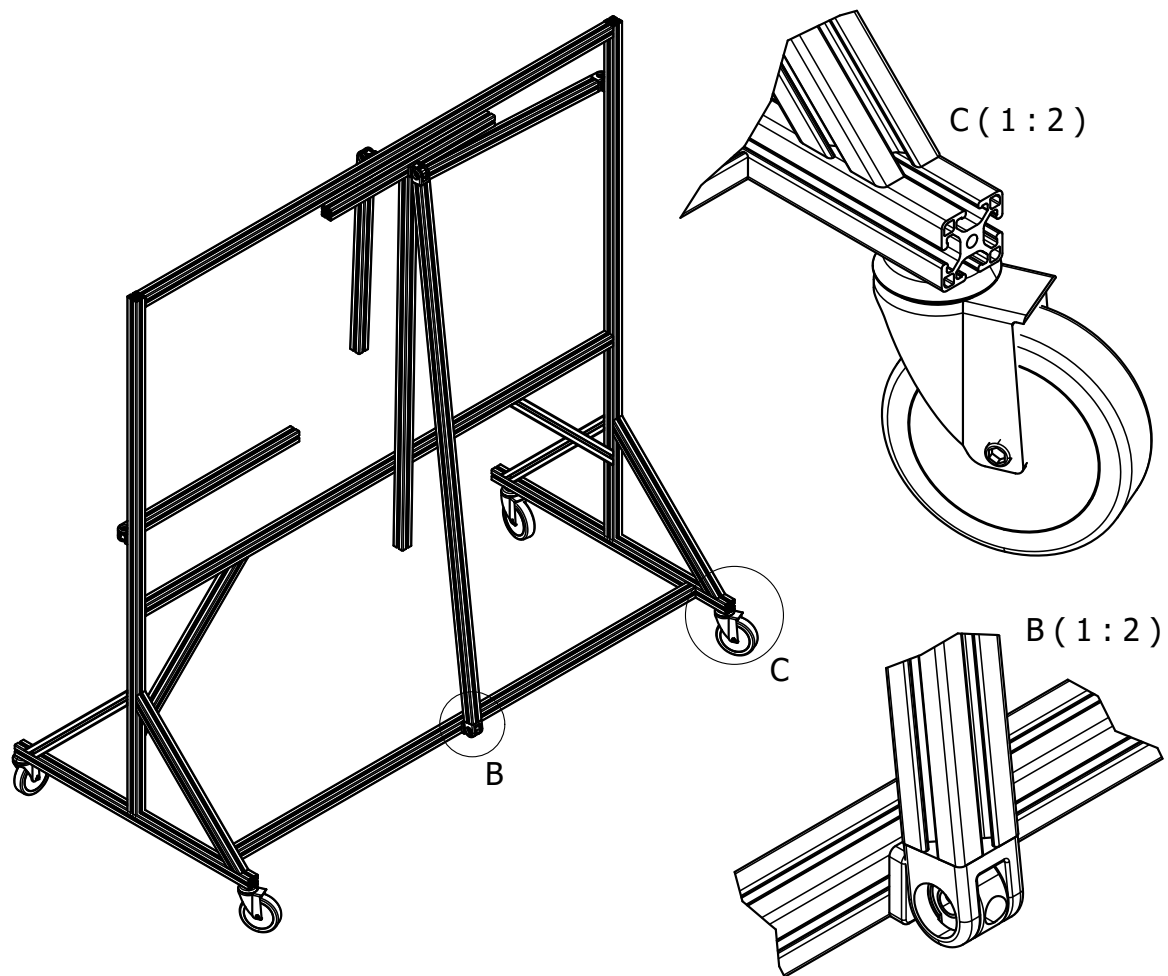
Lightboard ready folded with detail view of the hinge and caster that is used
